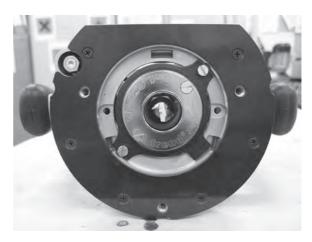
View of base of router fitted with a 16 mm stair housing dovetail cutter and a 30 mm guide bush.
